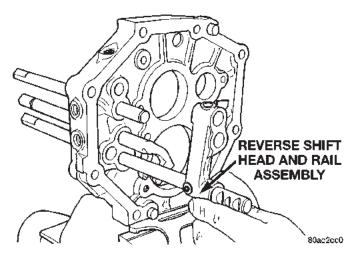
Remove Reverse Shift Head And Rail Assembly
